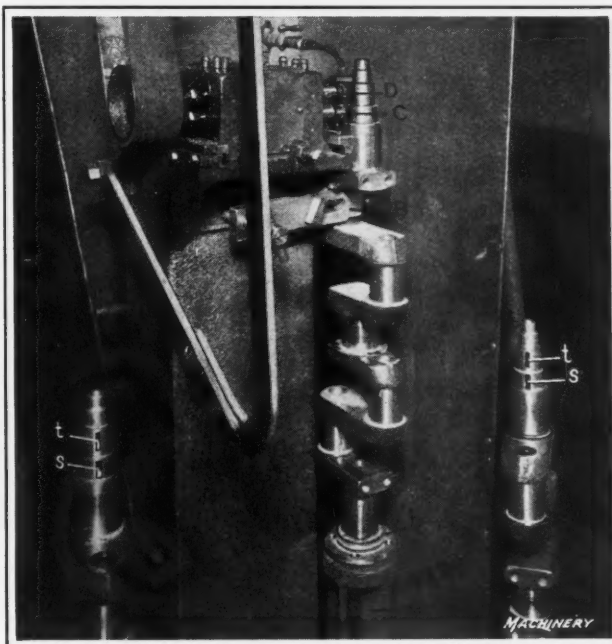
Special Duplex Milling Machine for Use in milling Keyways *s* and *t* in the Essex Crankshafts
